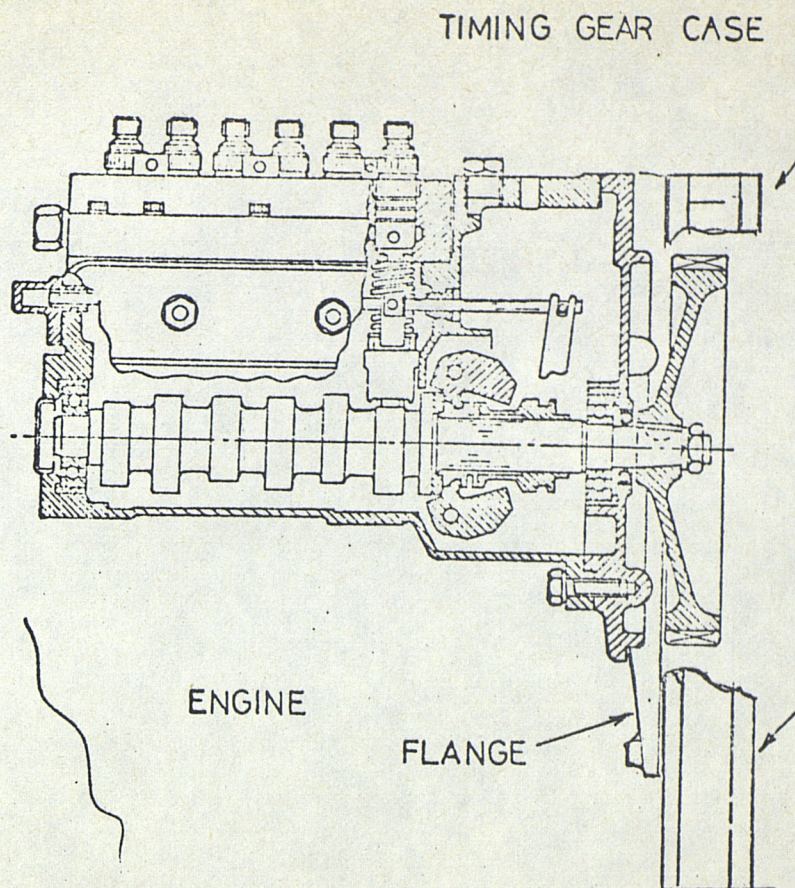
DIAGRAM SHOWING PUMP DRIVE GEAR
